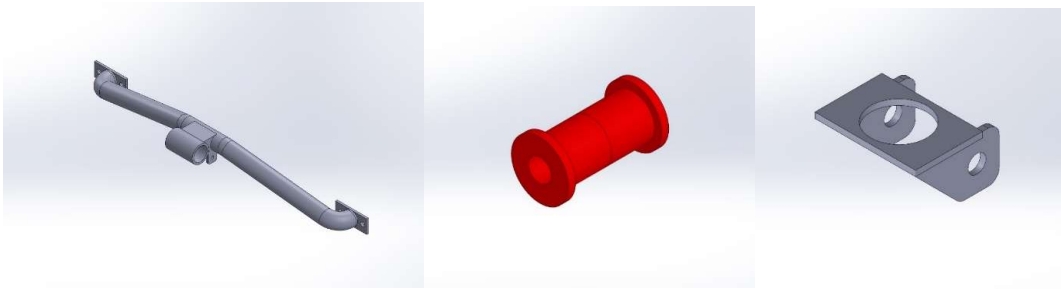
Rear mount elements (from left: rear bar, bushing and the chassis mount)
